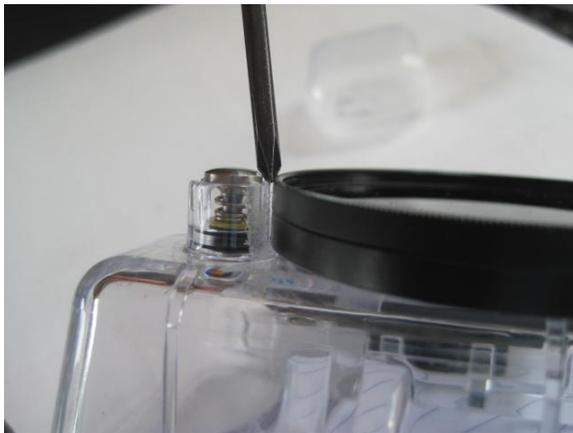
Exterior trimming of the push-button to clear the filter adapter.
